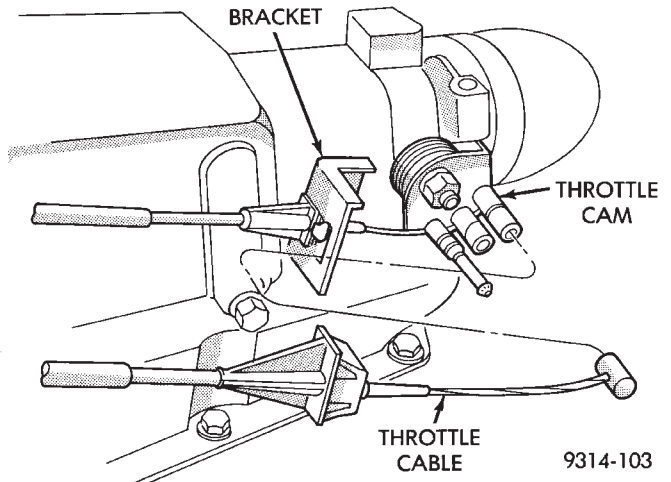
Throttle Cable Removal/Installation—3.5L Engine
